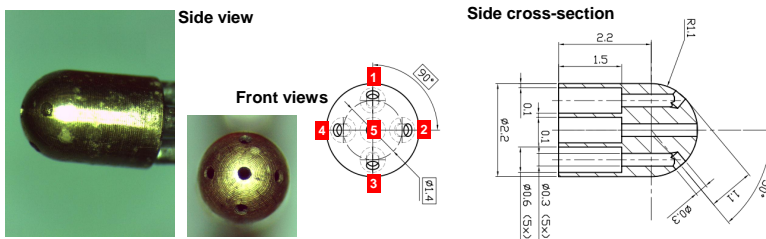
Design of the hemispherical 5 hole probe head and hole number location.
